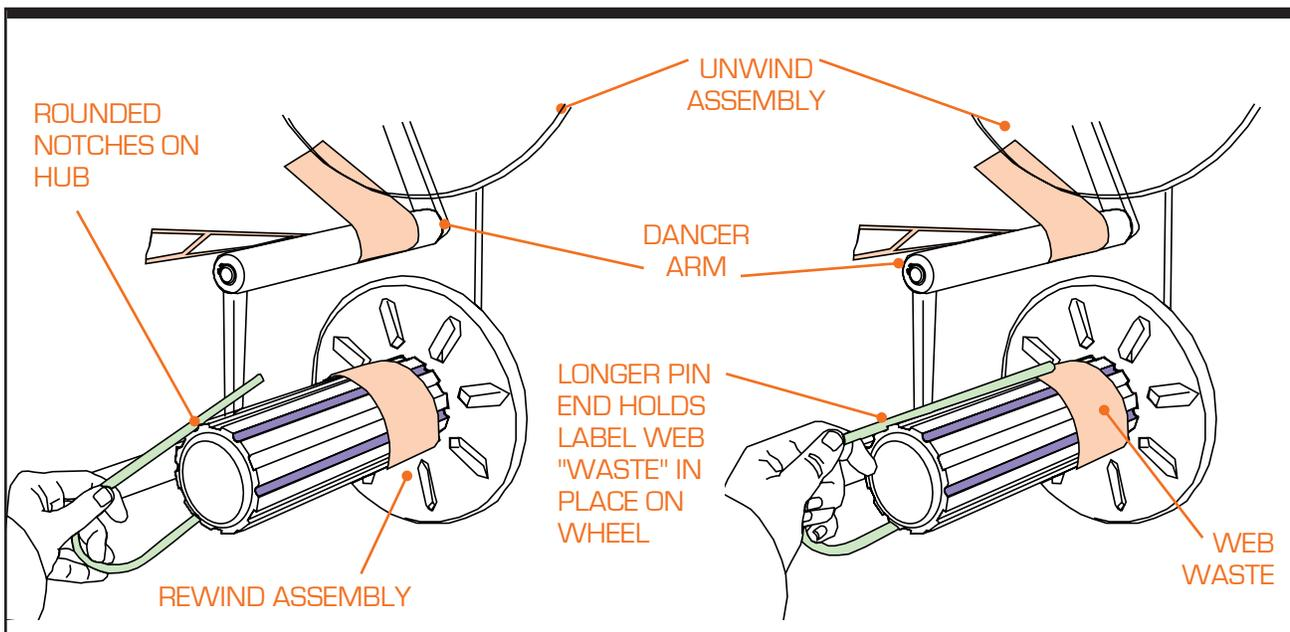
Web Holding Pull Pin on Rewind Wheel
